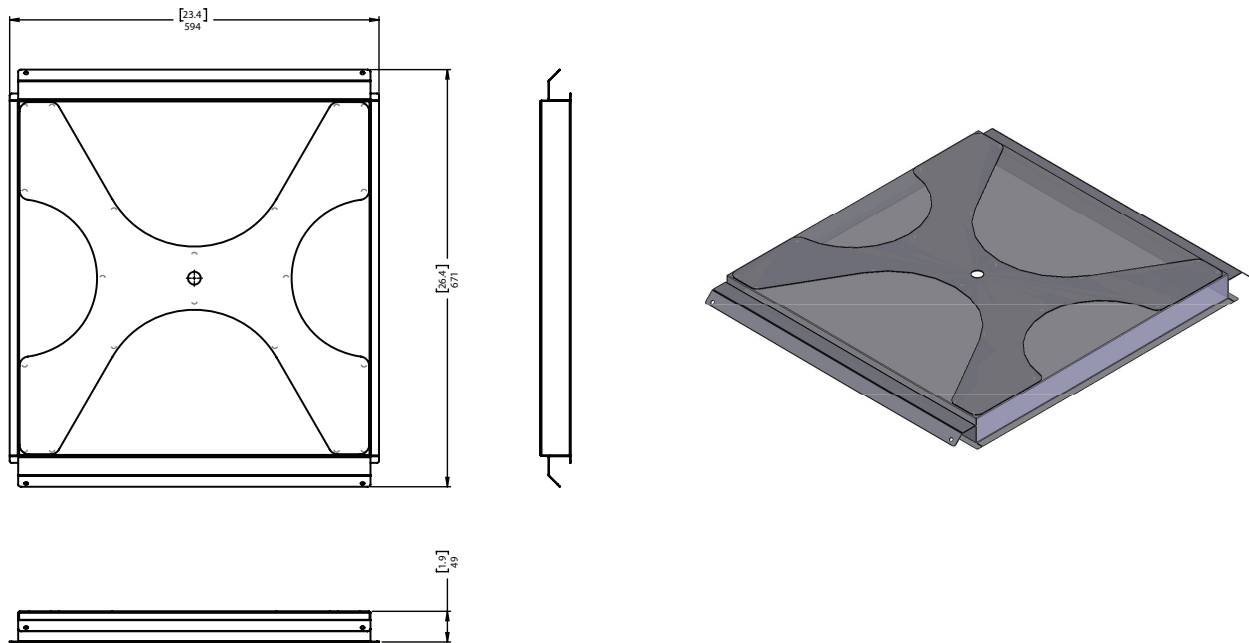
Flat-mount Rigging Kit (FCT-24) Top and Side Views [Inches] mm
